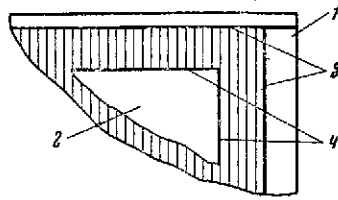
Basing of the billet. 1 -- die; 2 -- plate; 3 -- base sides of the die; 4 -- base sides of the plate.
